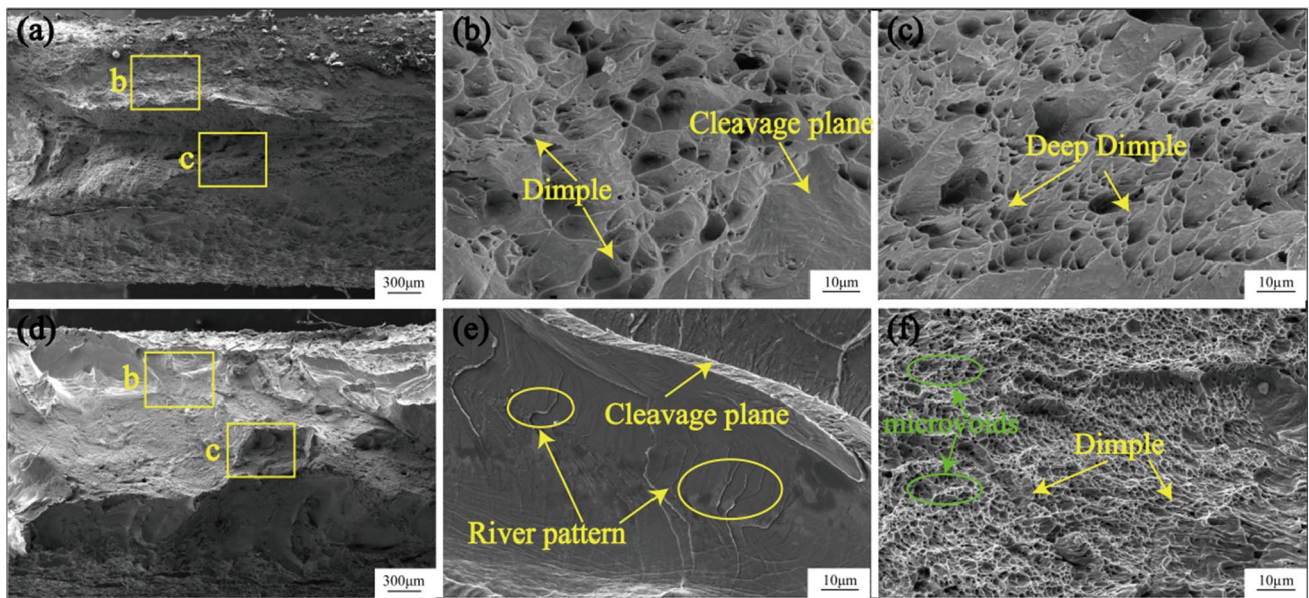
Impact fracture morphology. a–c BM; d–f No. 6 welded joints
